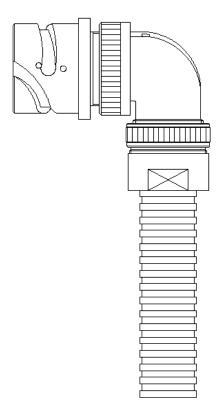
Example of Finished Assembly (90 Degree Elbow)
